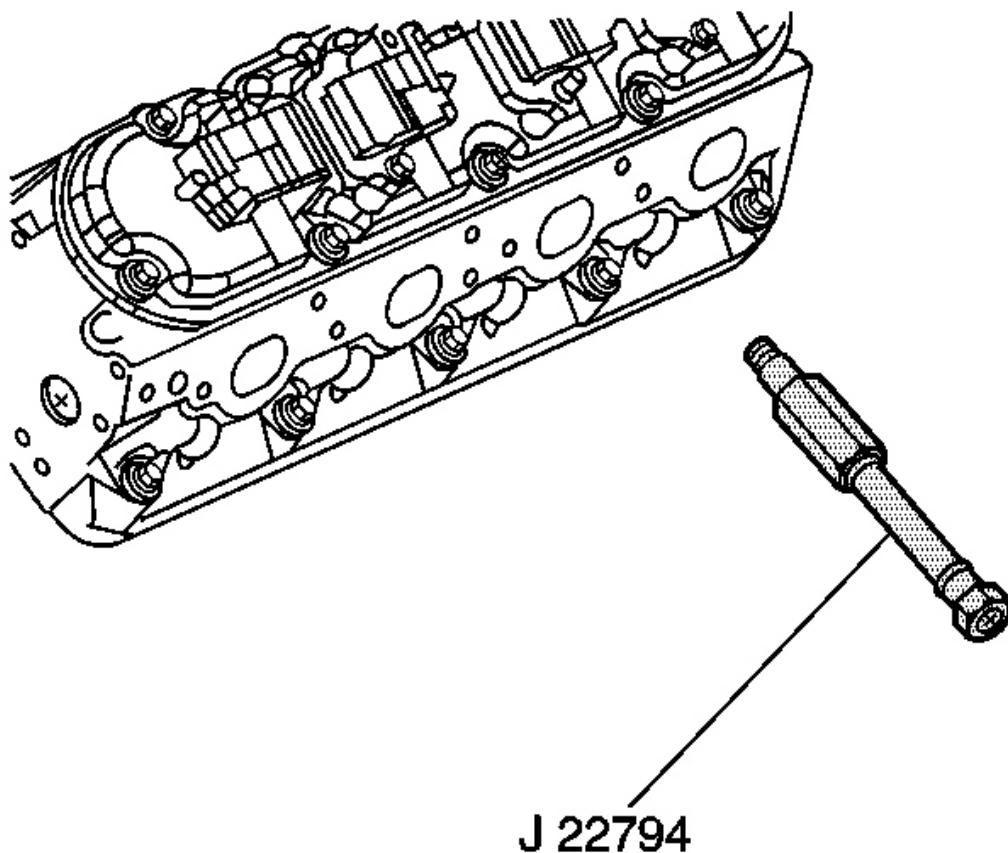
Install/Remove J 22794 Spark Plug Hole
